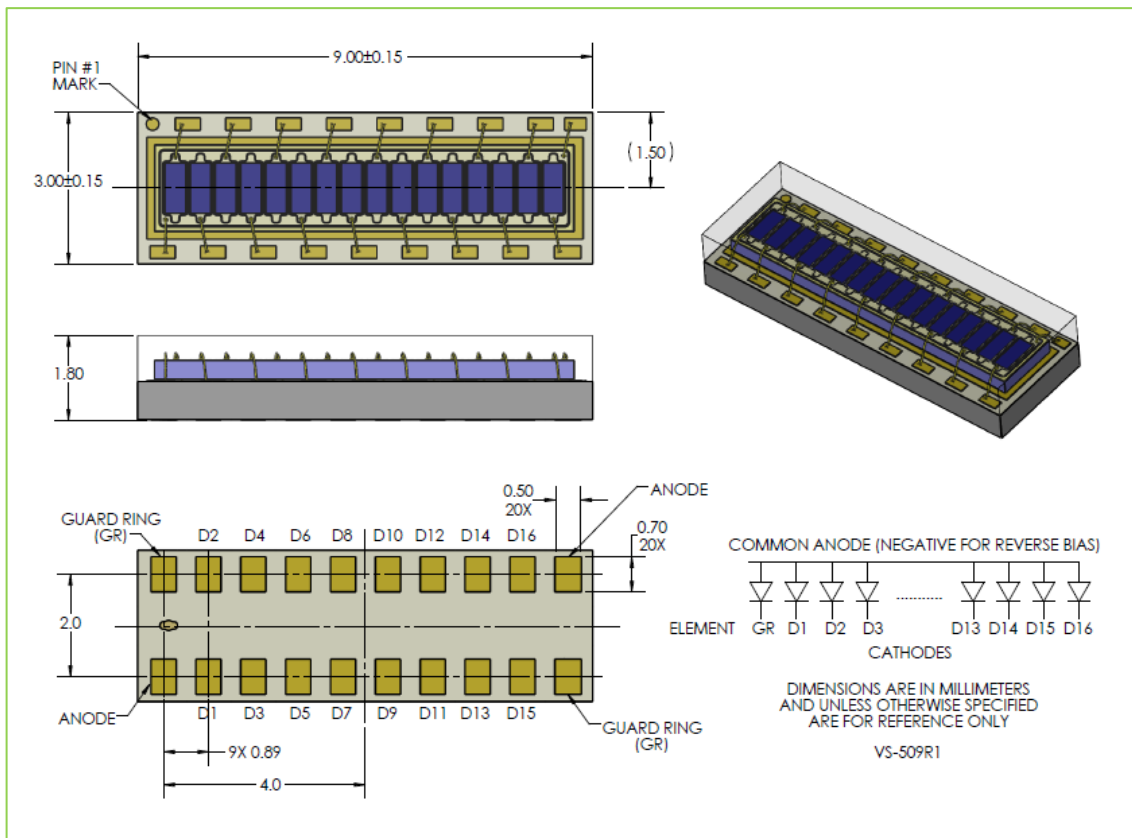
Leadless laminate carrier (LLC) MA package - C30737MA-05-16-90. Dimensions in mm.
